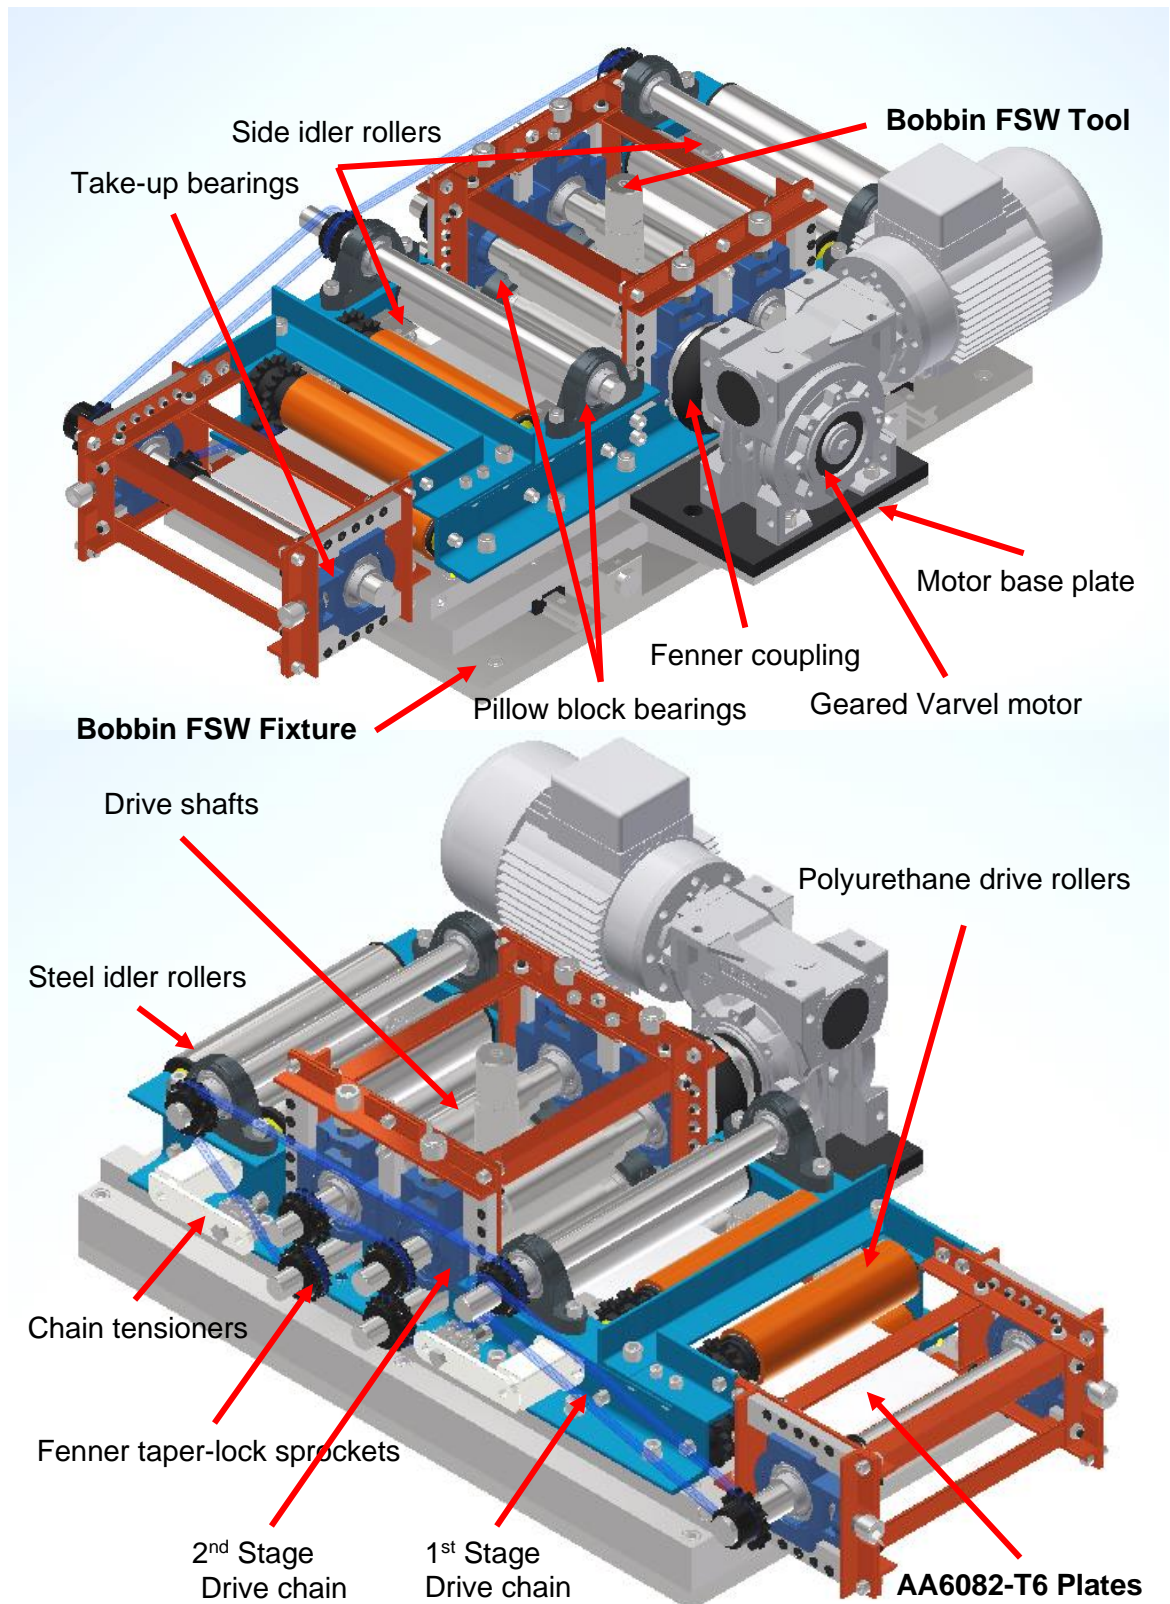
Special short-bed fixture design of the Bobbin FSW Feeder and Tool.
